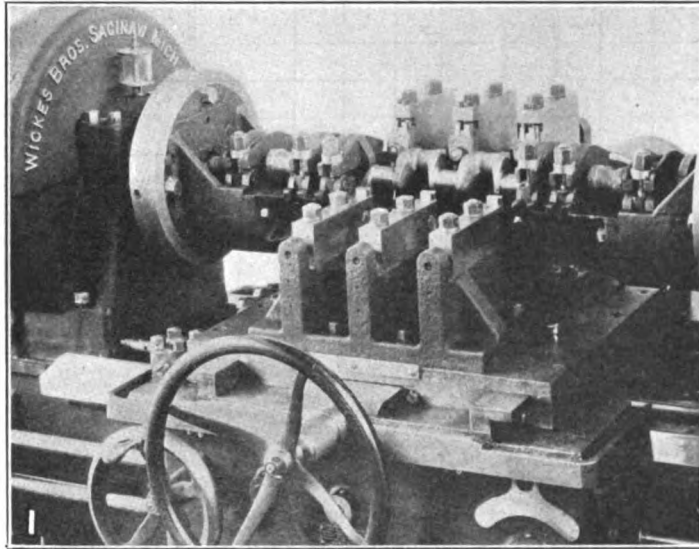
TURNING THE THREE CENTER BEARINGS. FIG. 2. LATHE EMPTIED TO SHOW TOOLS
